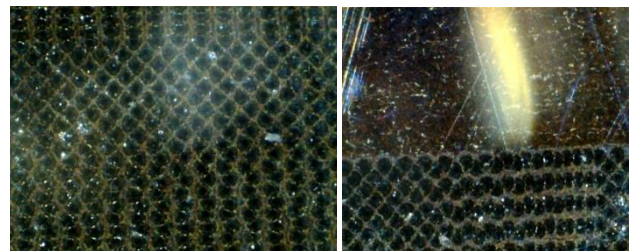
Welding seam laser cleaned at  $f=2$  kHz,  $\tau=80$  ns,  $P=20\%$ , 400X magnification
